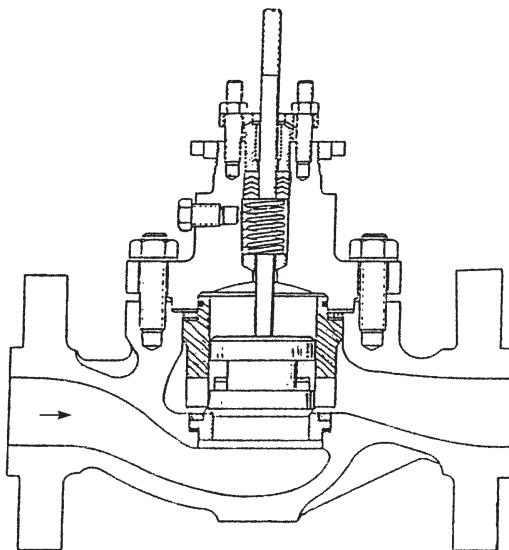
Cage guided cage valve [Courtesy—Fisher Control].
